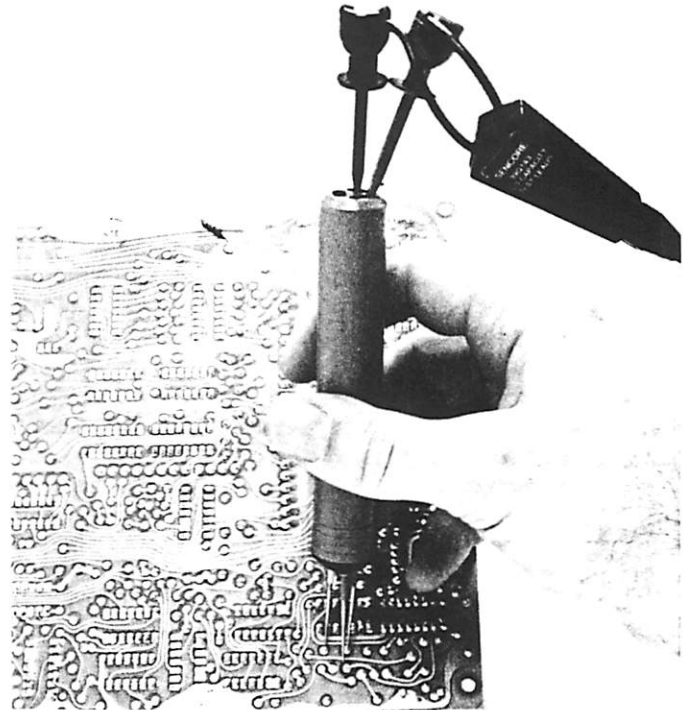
Use the optional touch test probe to measure inductors mounted on PC boards.
